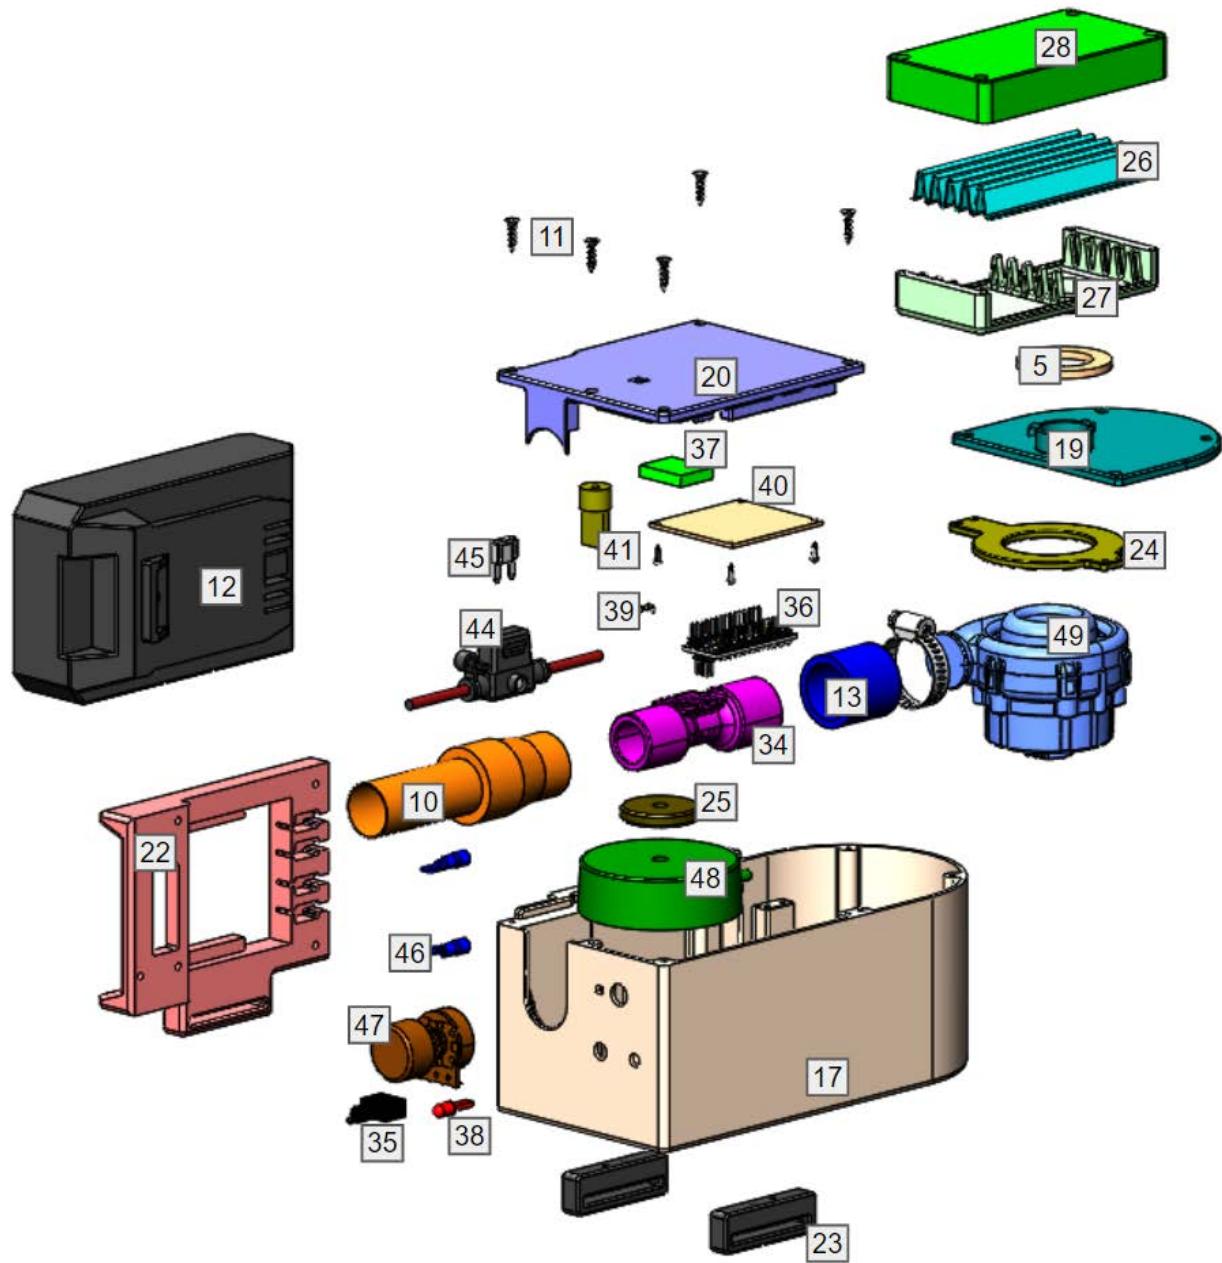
ebmpapst blower assembly exploded view, with Item Number labeling
